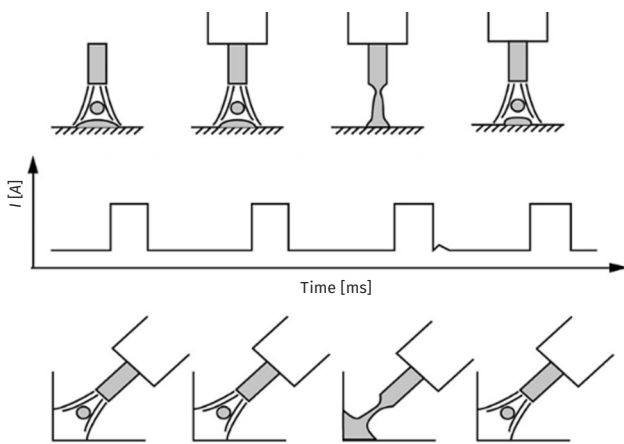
Sequence of pulsed robotic MAG welding
